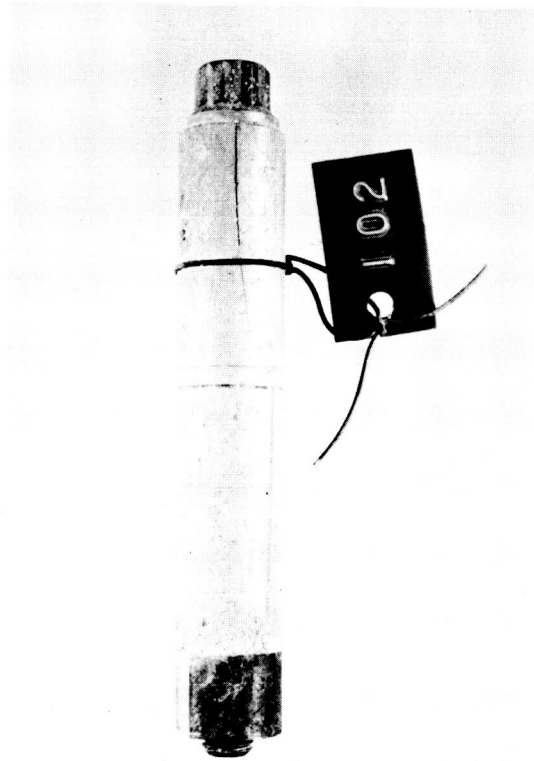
Ti 1Al-8V-5Fe Tension Bolt Installed
